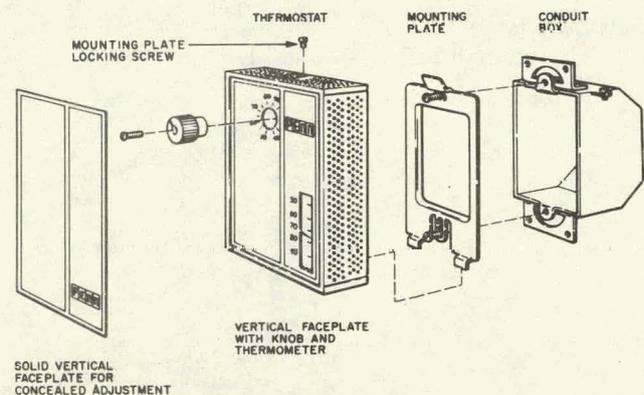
Line drawing illustrating method of mounting a vertical thermostat to outlet box. Also shown is a solid vertical faceplate for concealed adjustment when desired.
